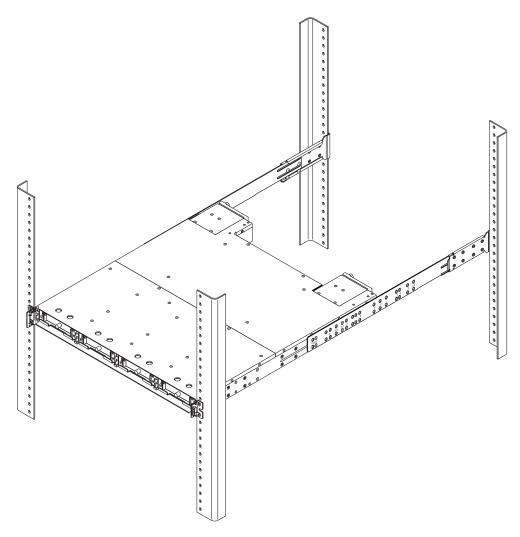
Rackmounted Cabinet Array Using Rear Brackets With Chassis Ears and Bezels Removed, After Installation
